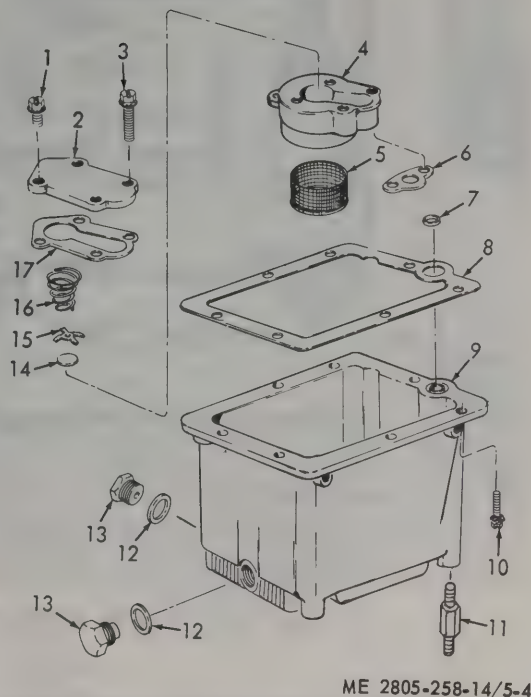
Oil pan and check valve, disassembly and reassembly.
